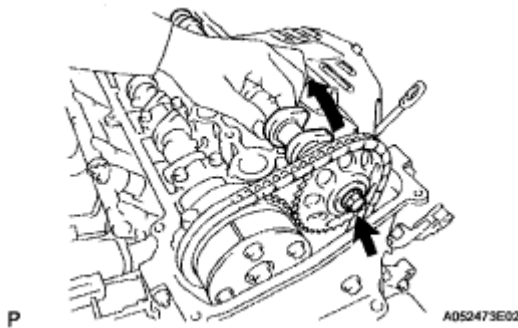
Removing Camshaft Timing Sprocket Set Bolt
